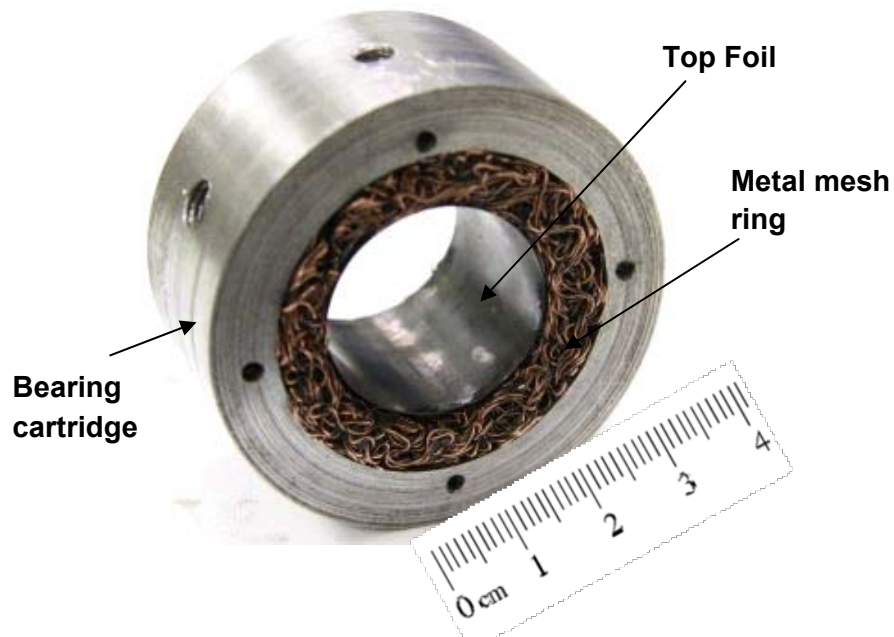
Photograph of a metal mesh foil bearing manufactured at TAMU
